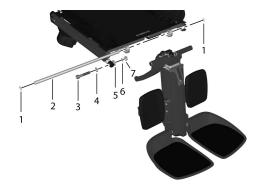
The leg rest is held in place by an axle (2) with a circlip (1) on the left and right hand side of the leg rest. The front bracket of the actuator is held in place by a screw (3), washer (4) and shim washer (5) and lock nut (7).
